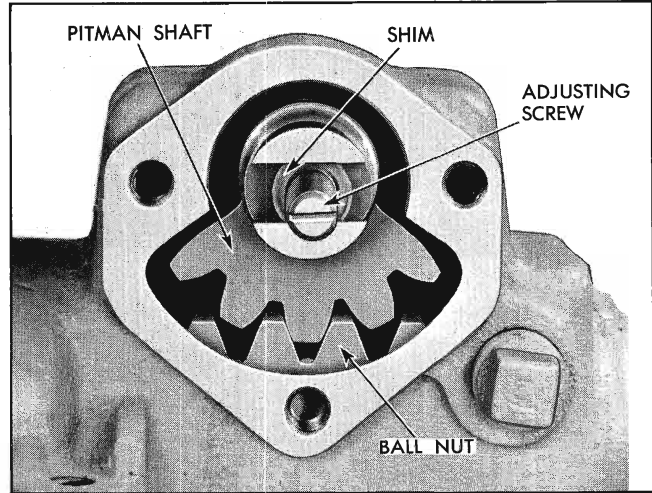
Positioning Pitman Shaft and Ball Nut
